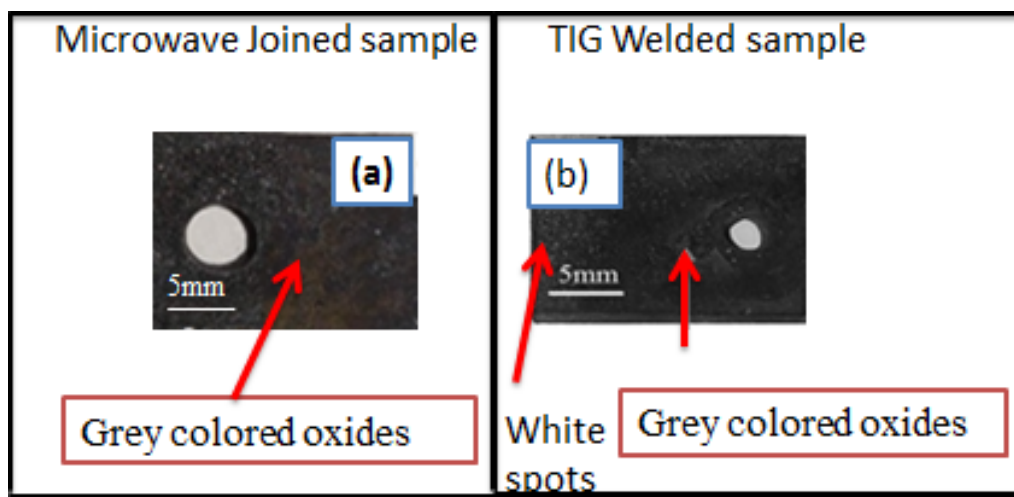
Macro photos of corroded (a) Microwave joined sample (b) TIG-welded sample after the exposure to the actual environment of boiler for 100 h
